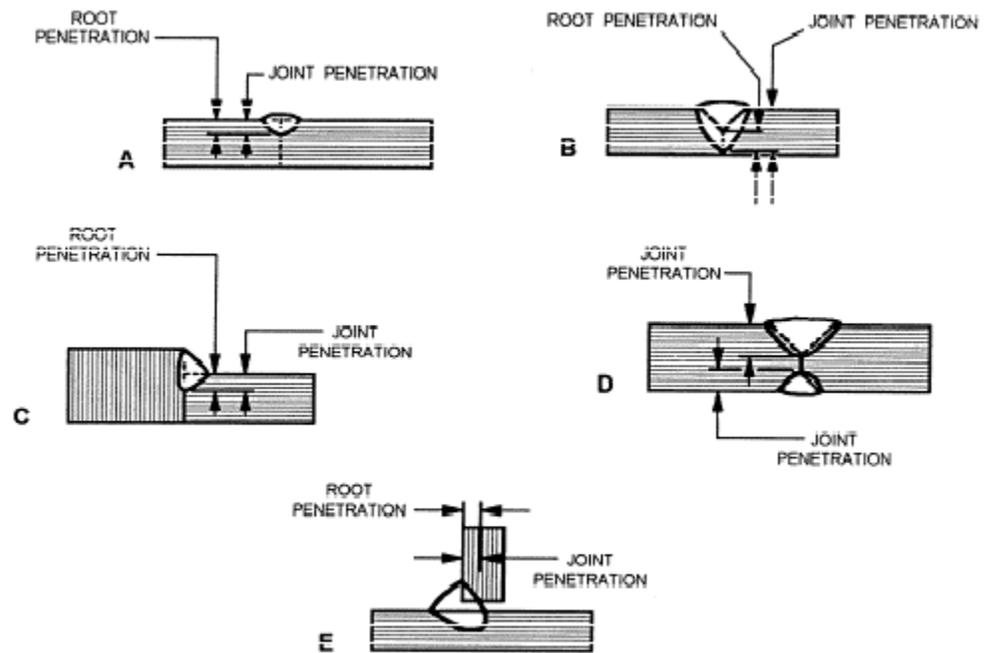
Root penetration and joint penetration of welds.
